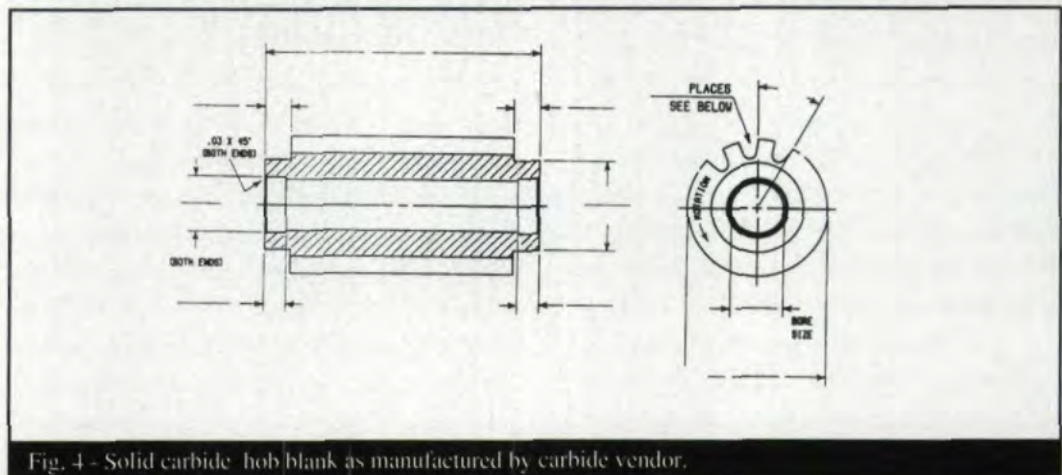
Solid carbide hob blank as manufactured by carbide vendor.
